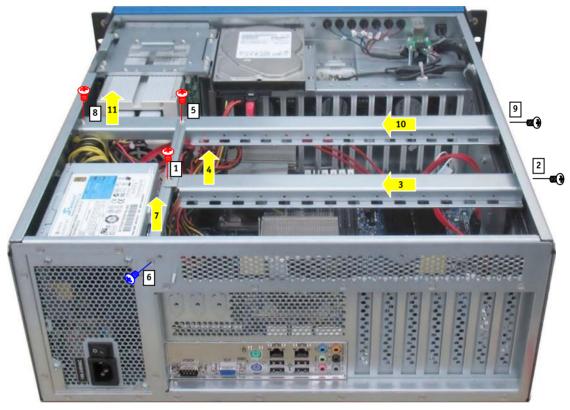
Opened KISS 4U V2 EATX platform - removing the card hold down brackets
